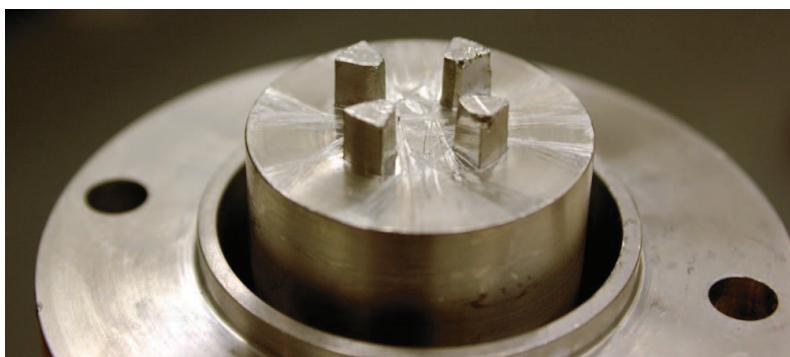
Our manufactured spider coupling adapter mounted on the motor.
